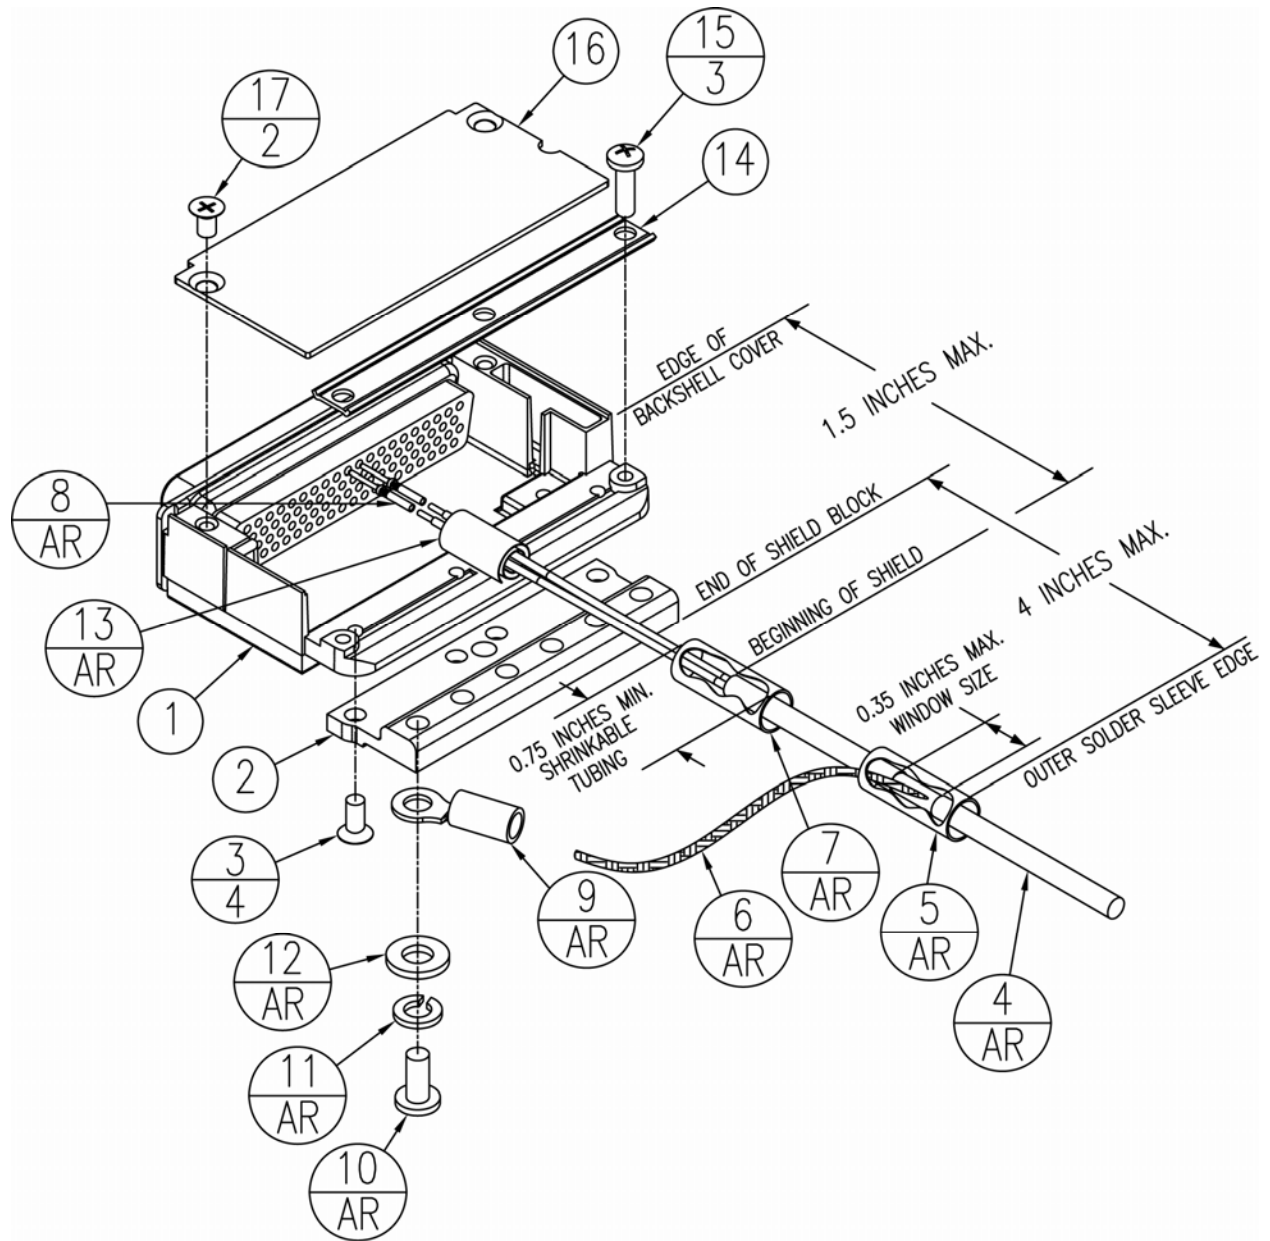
Shield Block Install onto a Backshell (78 pin example)
